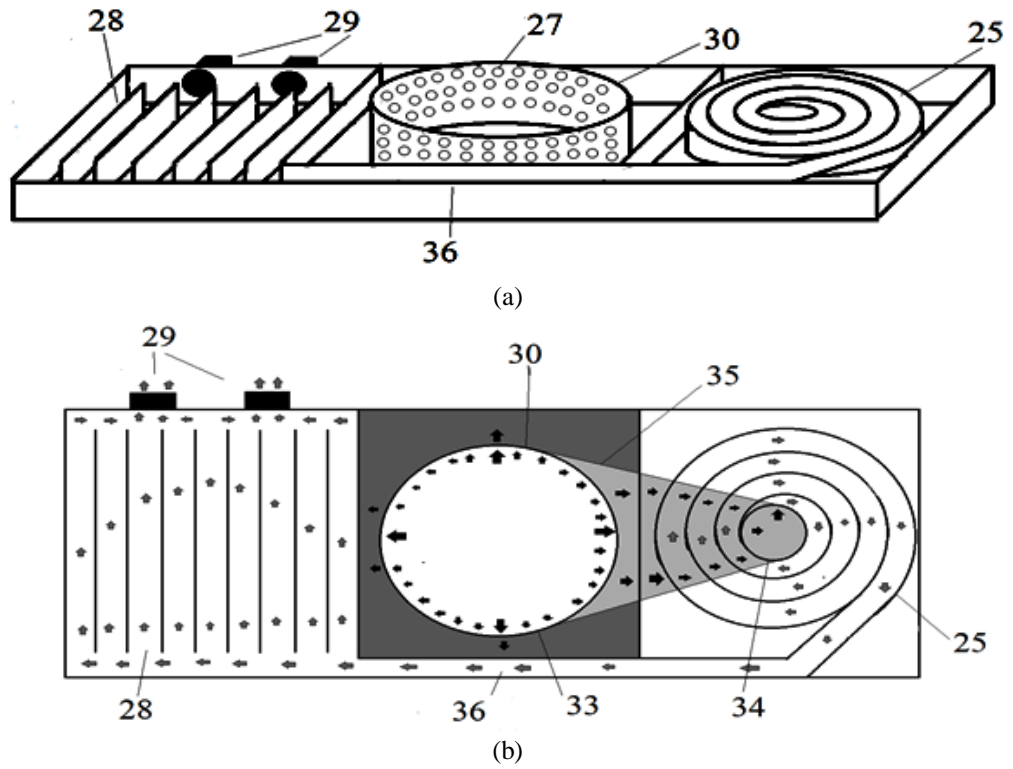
Assembly inside upper chamber (a) Flue gas heat extractors (b) Flue gas flow path inside flue gas heat extractors with parts listed in Table E.1 of Appendix E [24]
